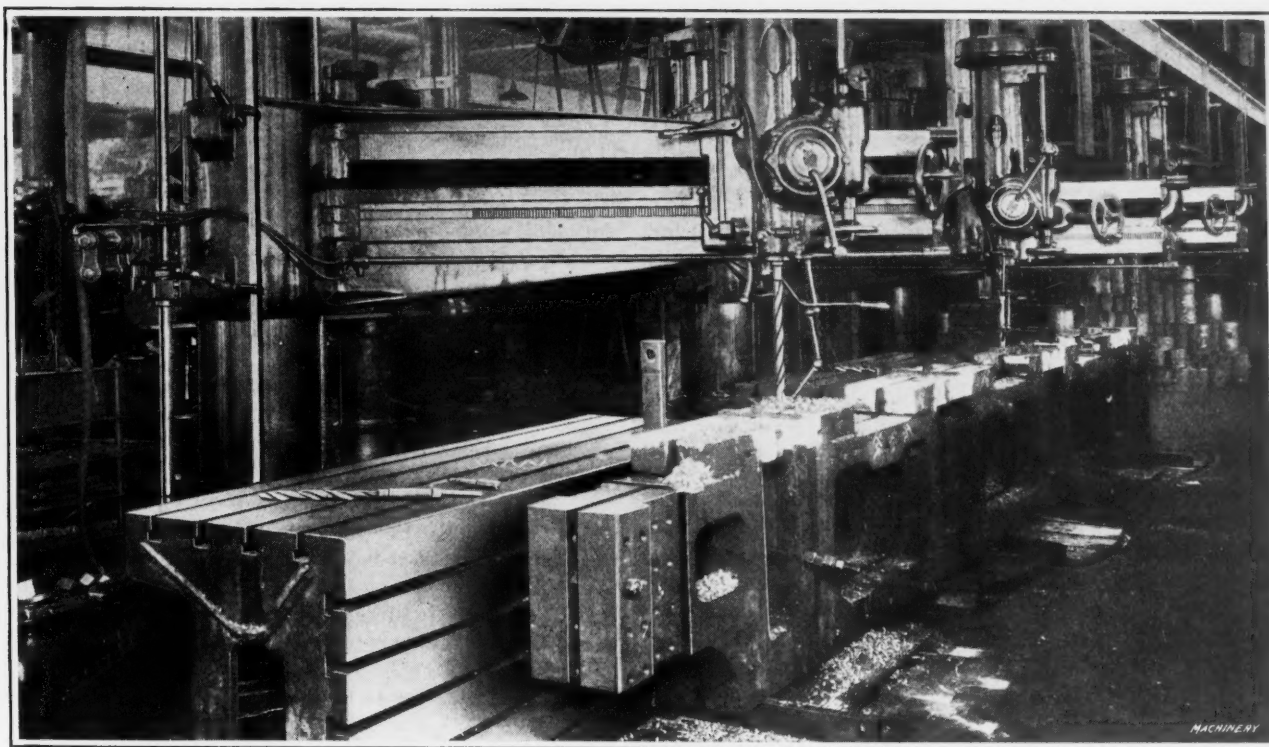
Battery of Four Radial Drilling Machines equipped with a Special Table for Locomotive Frame Drilling and Miscellaneous Work
